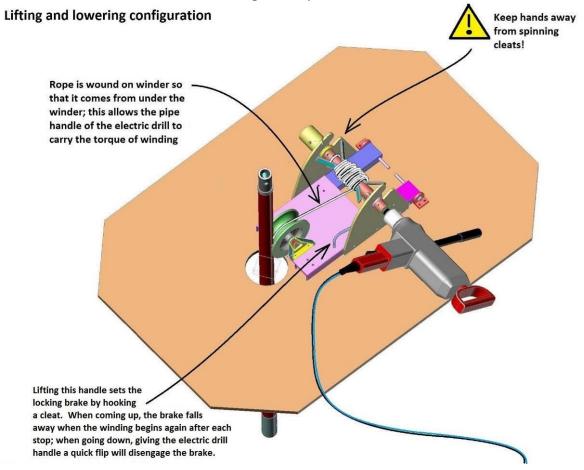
The SideWinder in its lifting and lowering configuration. The top of the drill string is shown protruding from the 'borehole'.
